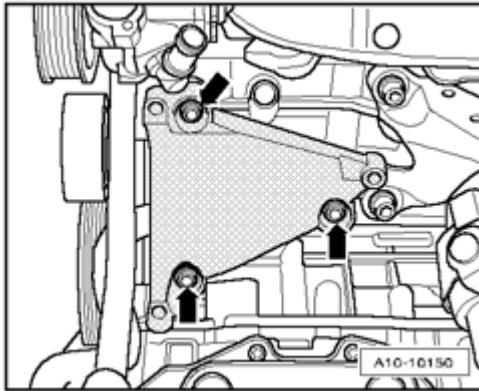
Removing Bolts And Air Conditioning Compressor Bracket
